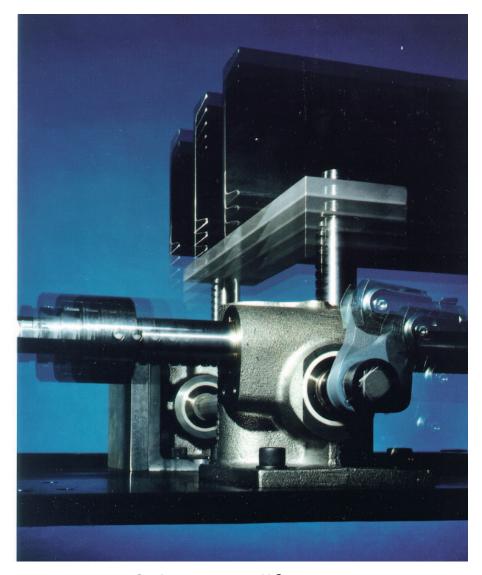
Rotating a component or sub-assembly during manufacturing.
